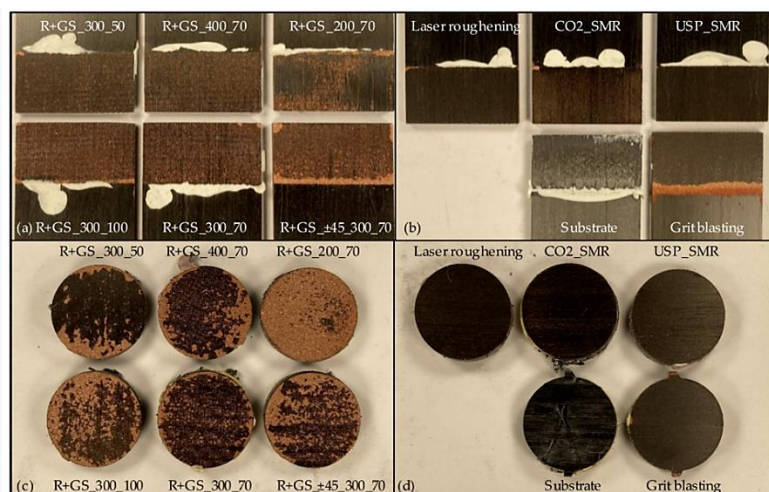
Fracture surfaces of CFRP substrates with copper coatings deposited by arc spraying, illustrating different failure modes after shear tensile tests (a, b) and pull-off tests (c, d) [5]
